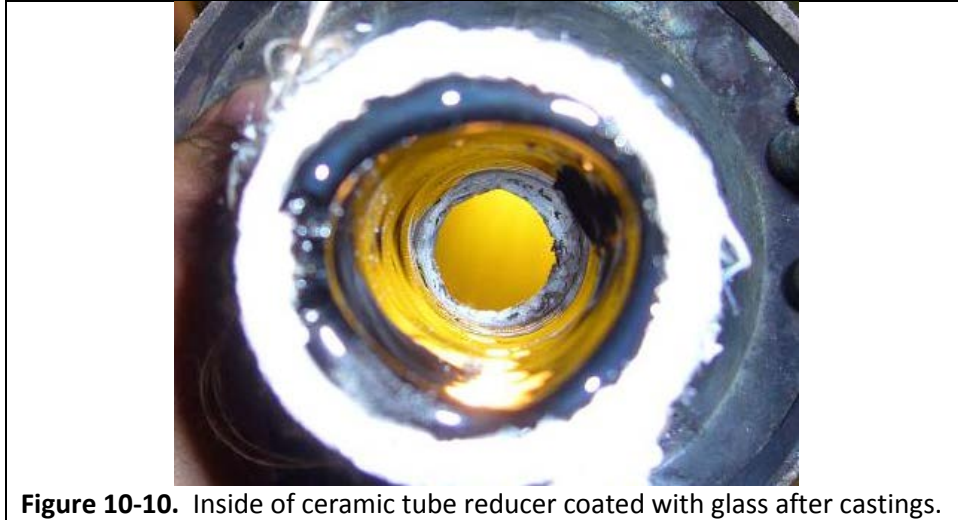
Inside of ceramic tube reducer coated with glass after castings.
